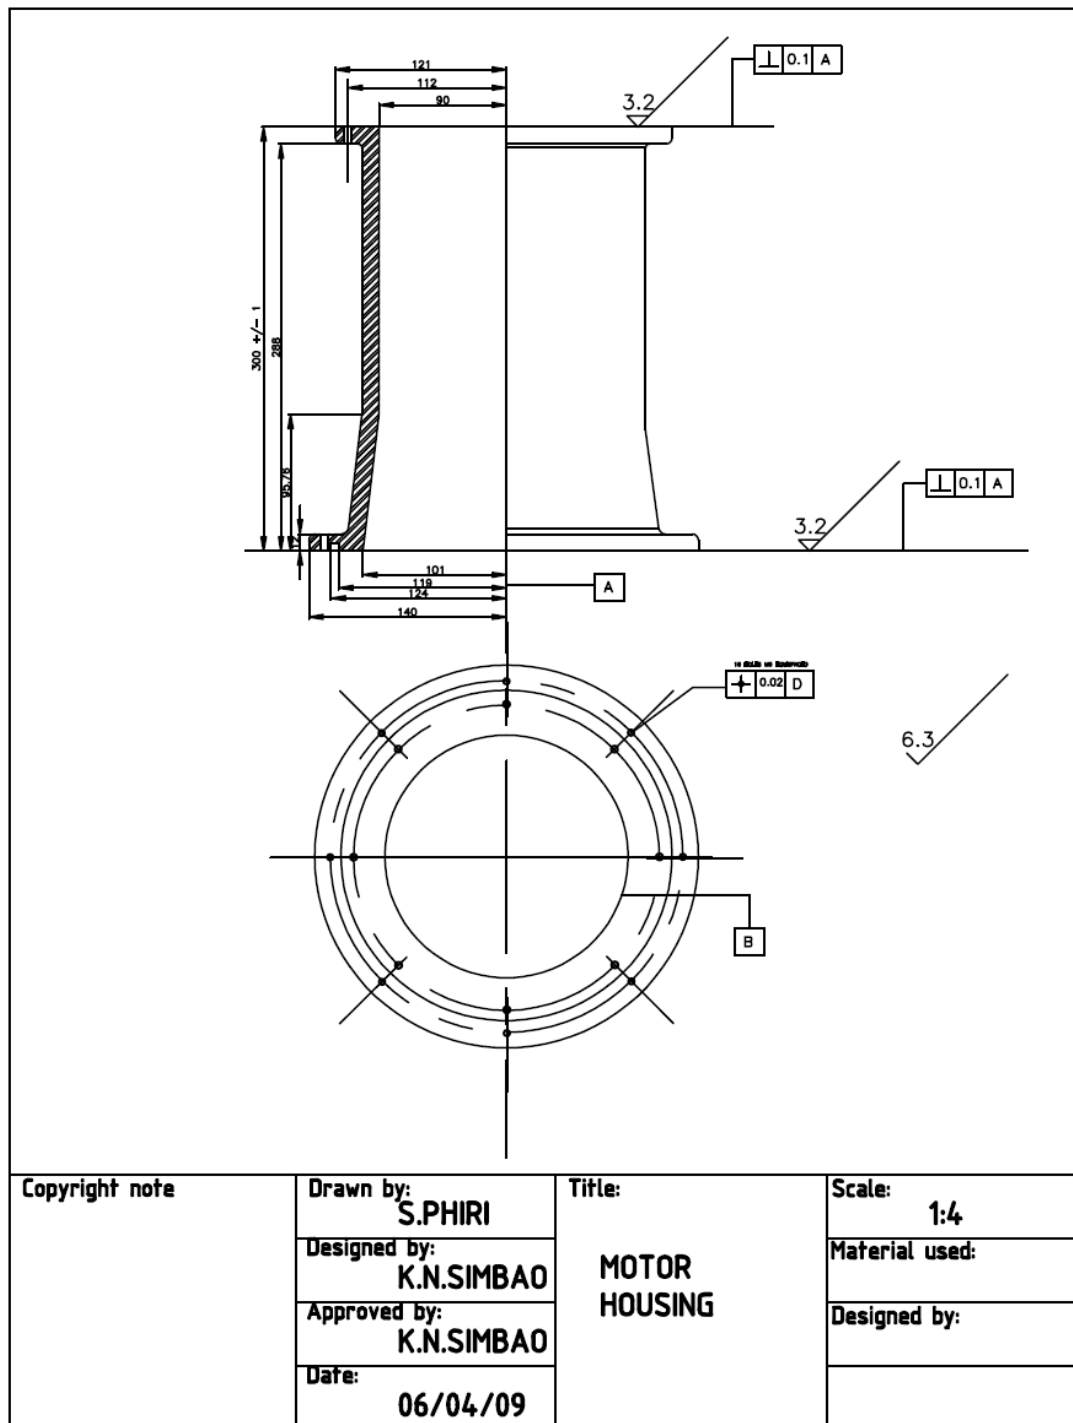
Modified Electric Motor Casing to suit the New Stator Dimensions Requirements
